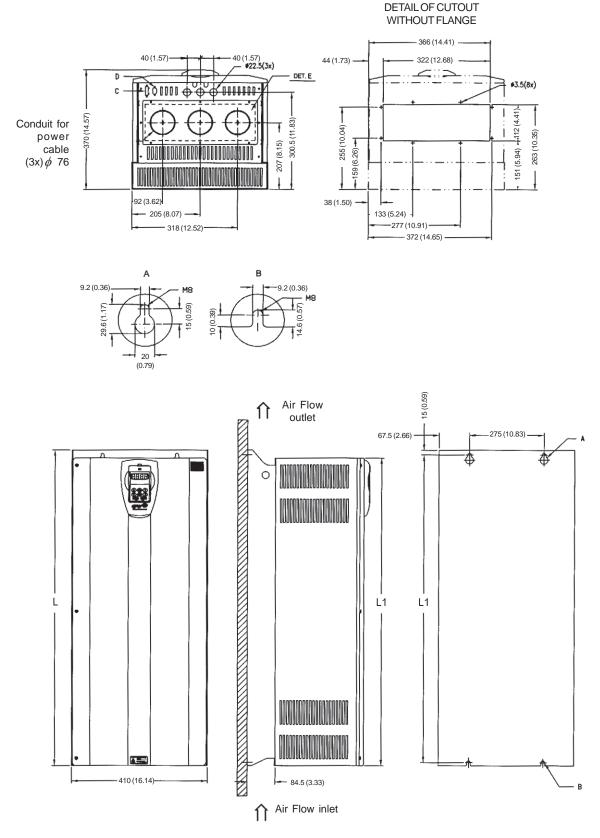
Size 7 - Dimensions in mm (inch)
